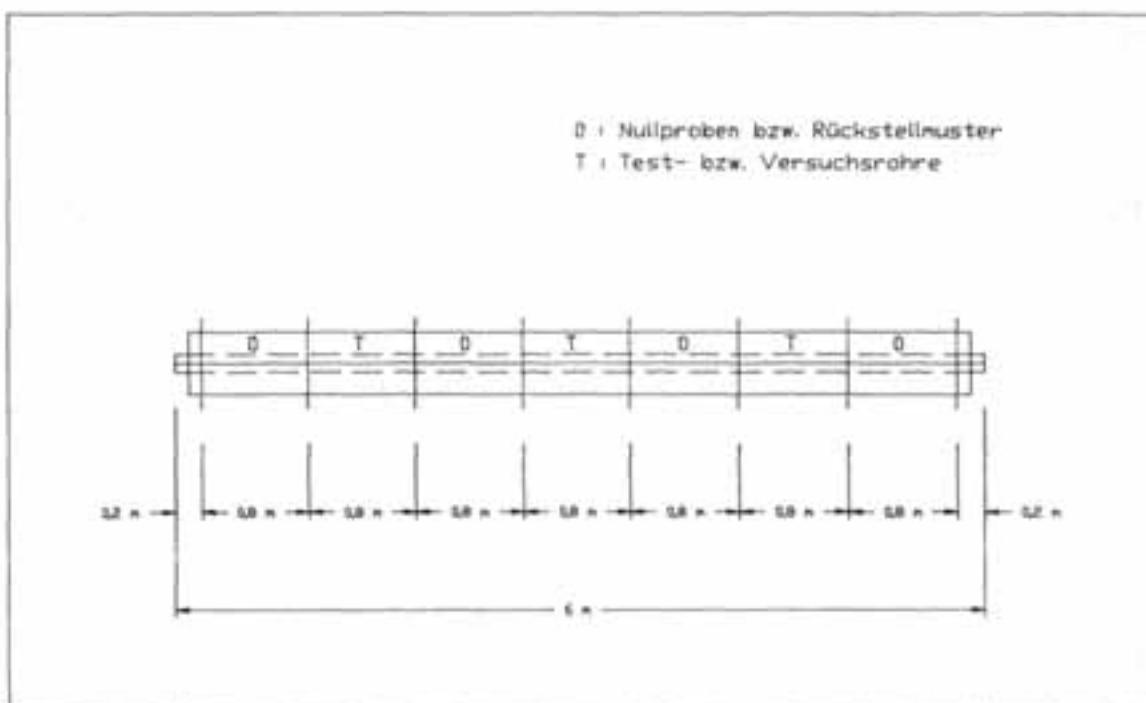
Cutting a 6 m long pipe into 7 test specimens
